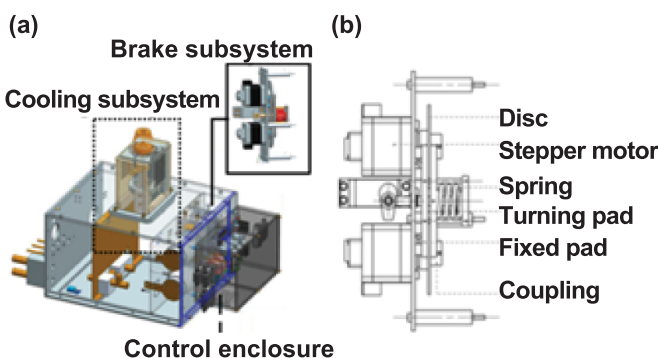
(a) CAD model of the novel PDS design, including three major modifications in brake, cooling and control enclosure. (b) Design of the brake subsystem, including disc, step motor, spring, turning pad, fixed pad and coupling.
